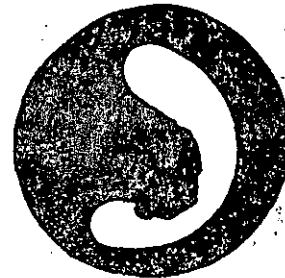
Example of eccentric pipe that failed in collapse because one side was too thin.
